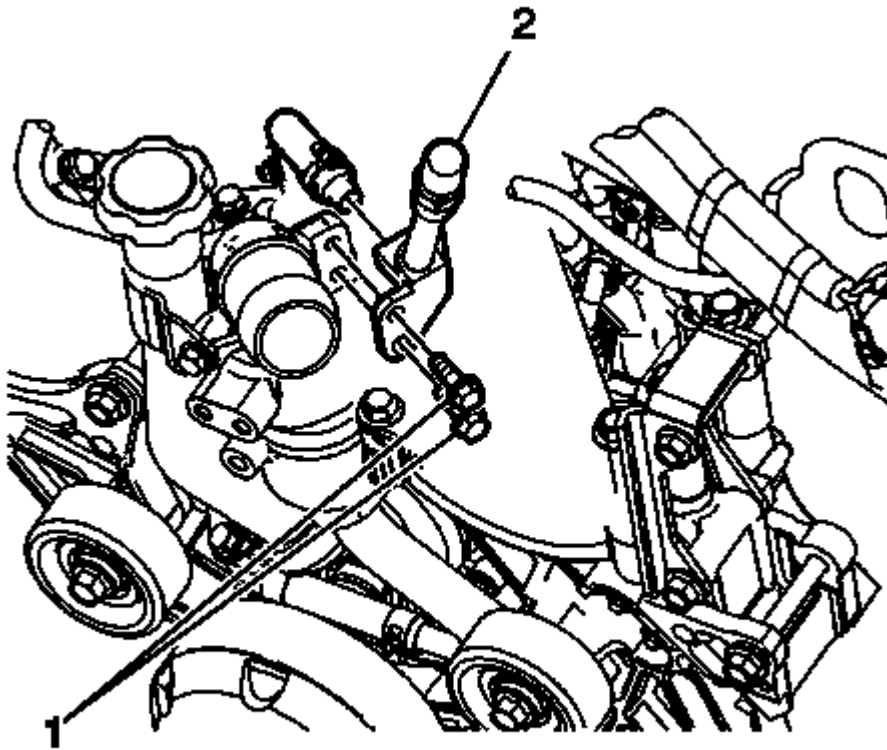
Identifying Fuel Pressure Valve And Bracket Bolts
